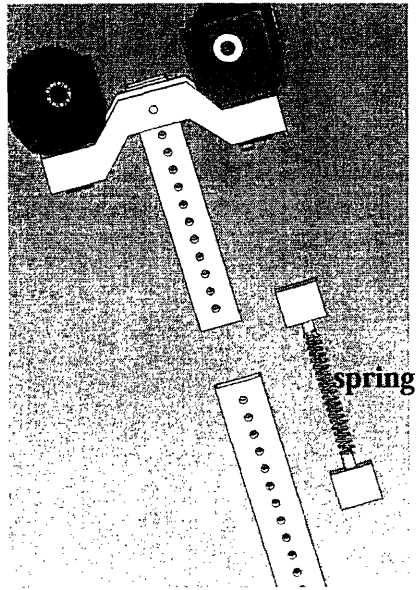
Tensioning system of exposed. The internal spring pushes the Wall-Mill against the ceiling and floor.
